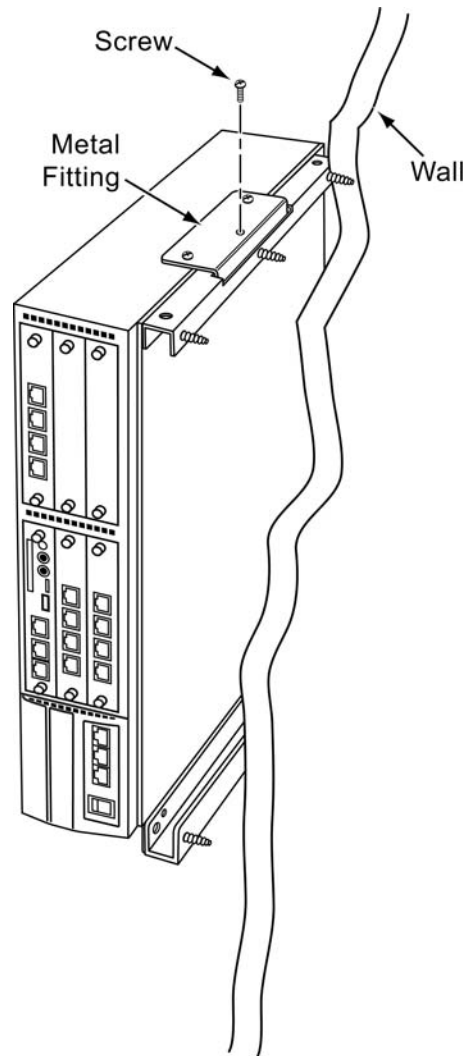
Secure Metal Fitting to Upper Wall Mount Bracket with a Screw
